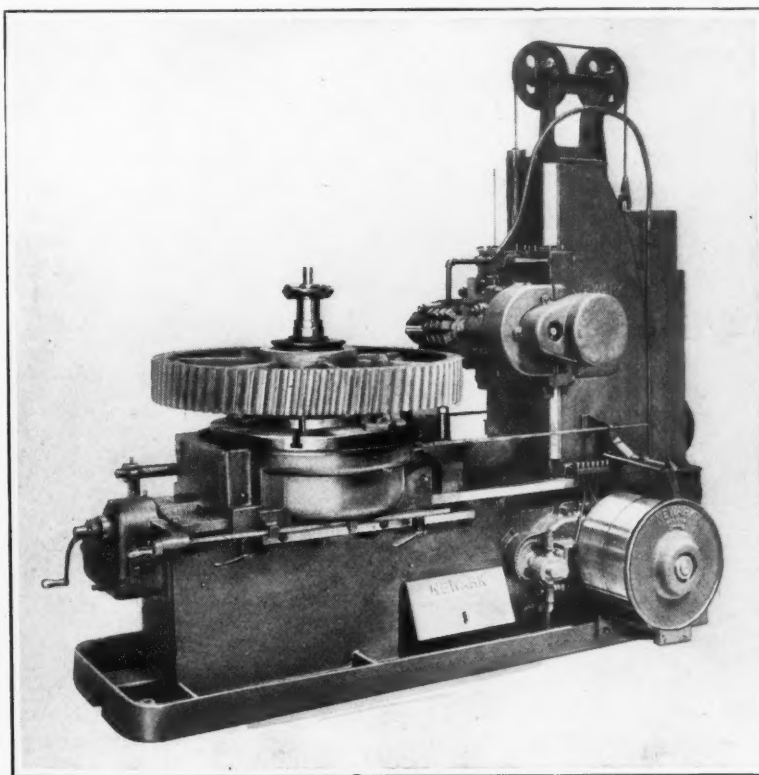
Newark No. 5 Gear-hobbing Machine cutting a Cast-iron Helical Gear
